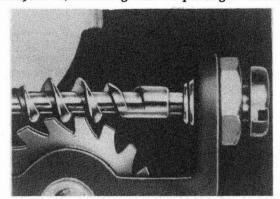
Worm Wheel Driving Governor Worm Assembly
